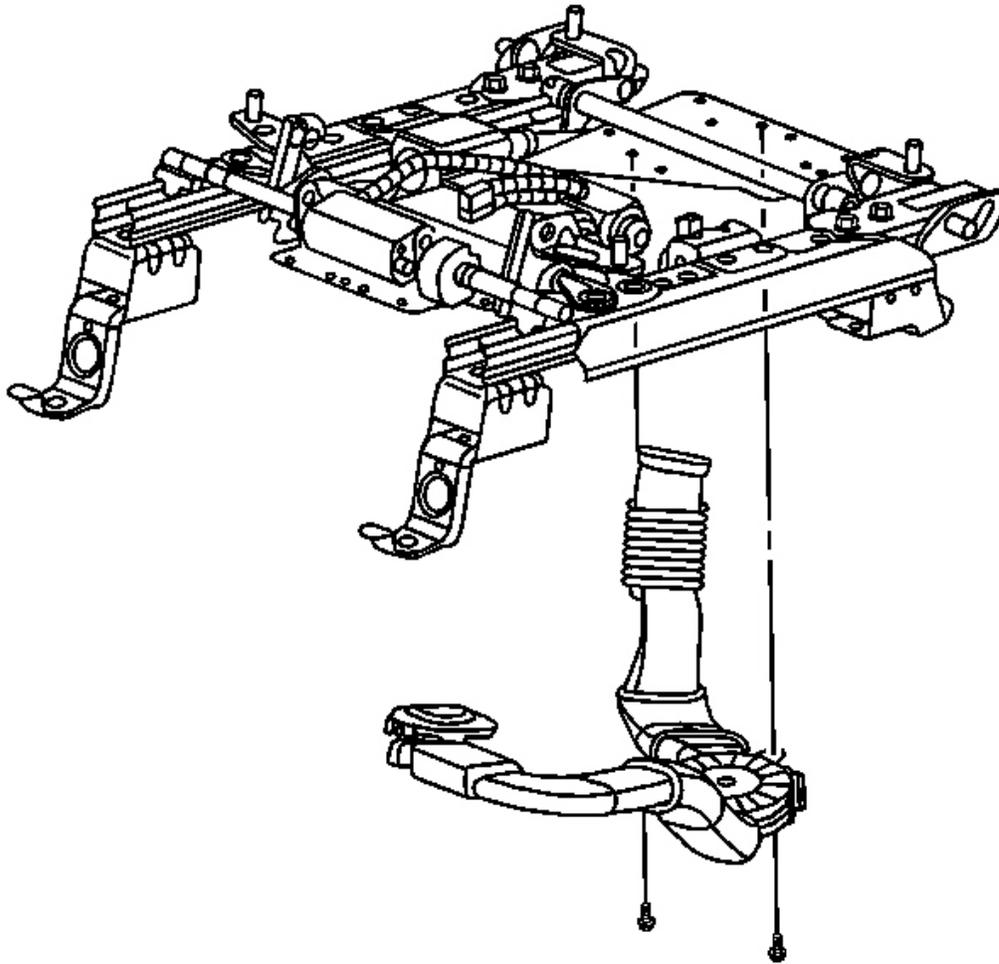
View Of Blower Assembly & Screws - Driver Seat
